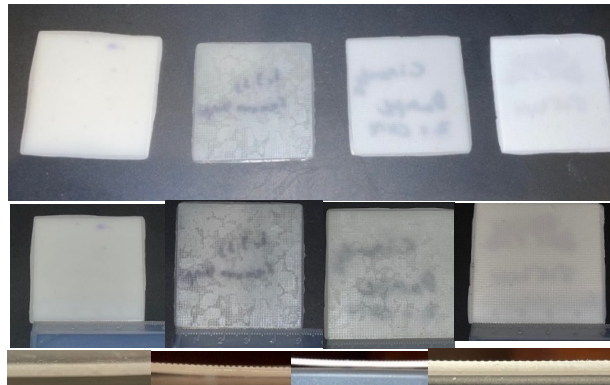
Patterned surfaces after printing. Left to right: flat surface, square bumps, circular bumps, and triangular spikes. Each surface is displayed with respective overall dimensions and side view below each sample. Defeathering can be observed on Circular Bumps and Triangular Spikes surfaces.
